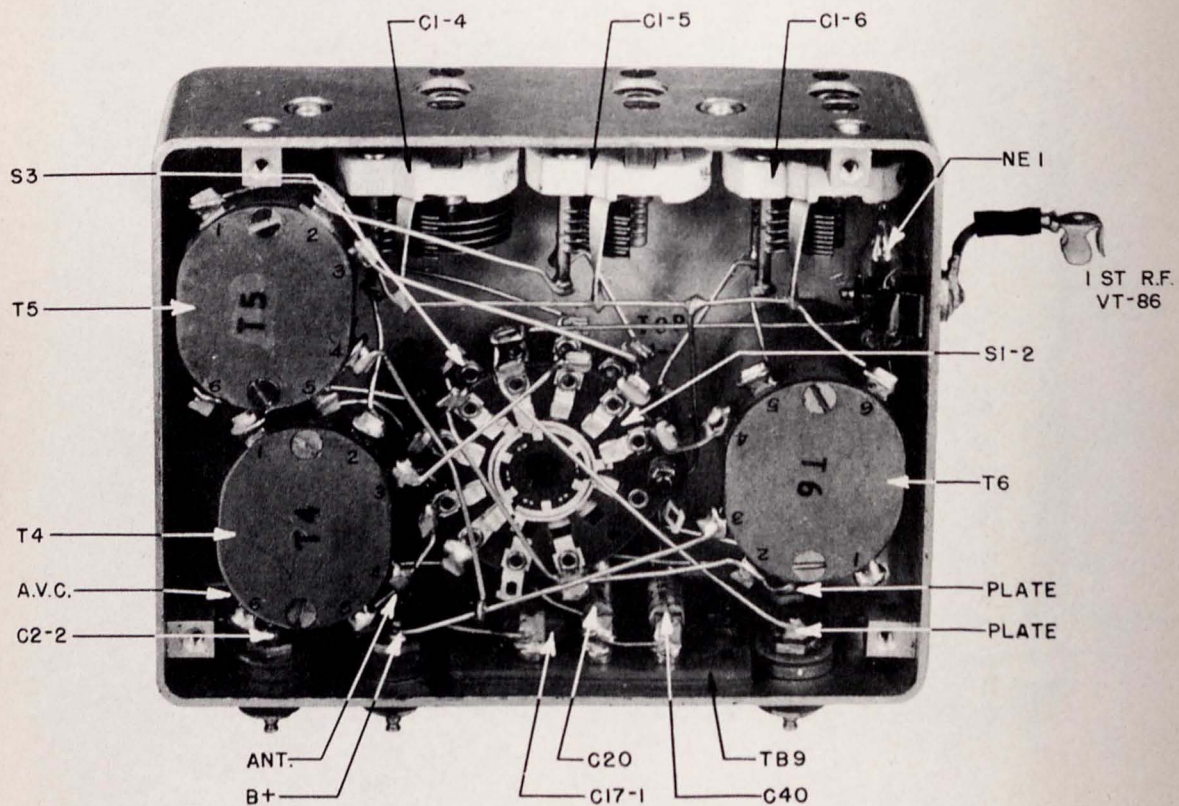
ANTENNA TUNING ASSEMBLY (102)
